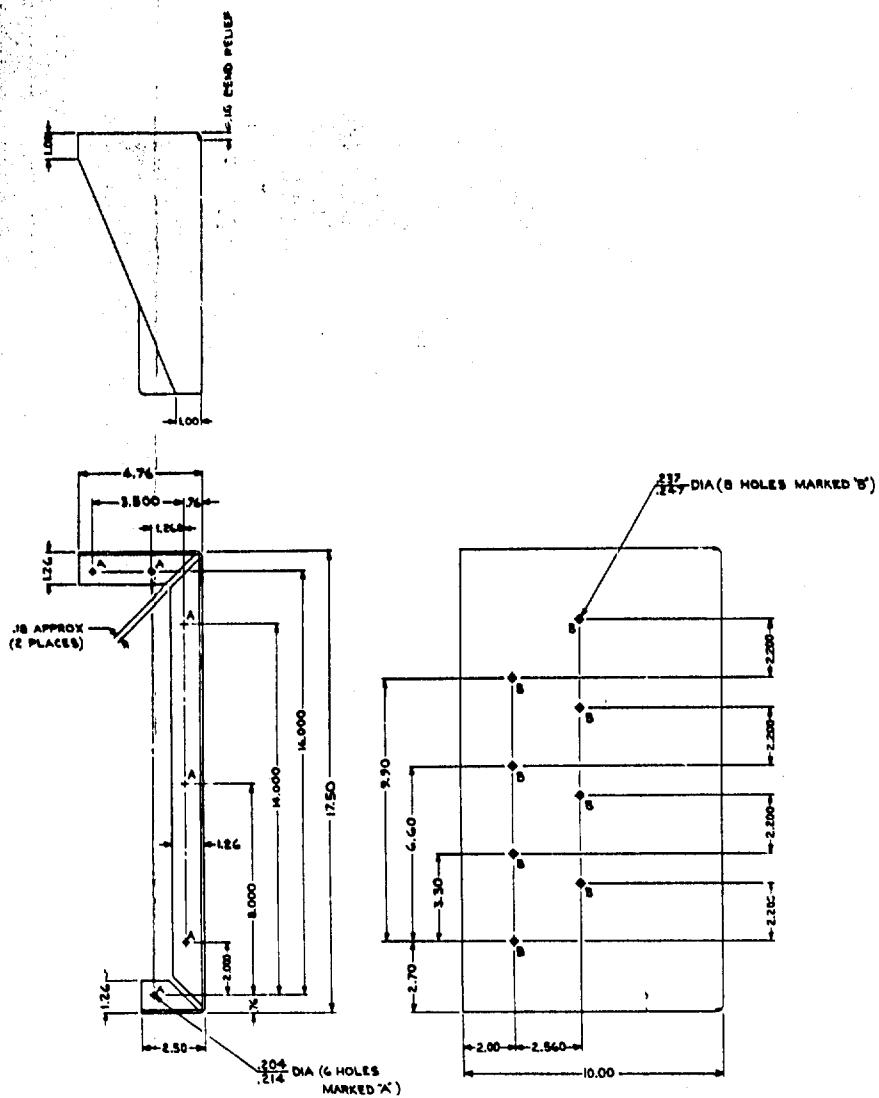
Control Unit Front Panel Drilling (C2205213)
